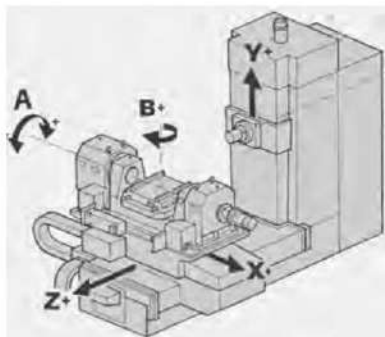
Horizontal-axis machining centre provided with a 2-axis rotary table (Courtesy, Dixi Machines SA, Switzerland)
